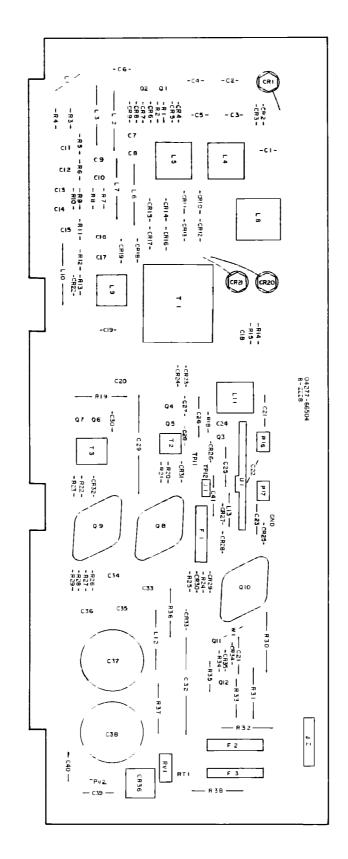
A4 POWER SUPPLY Board Assembly Component Locations.
